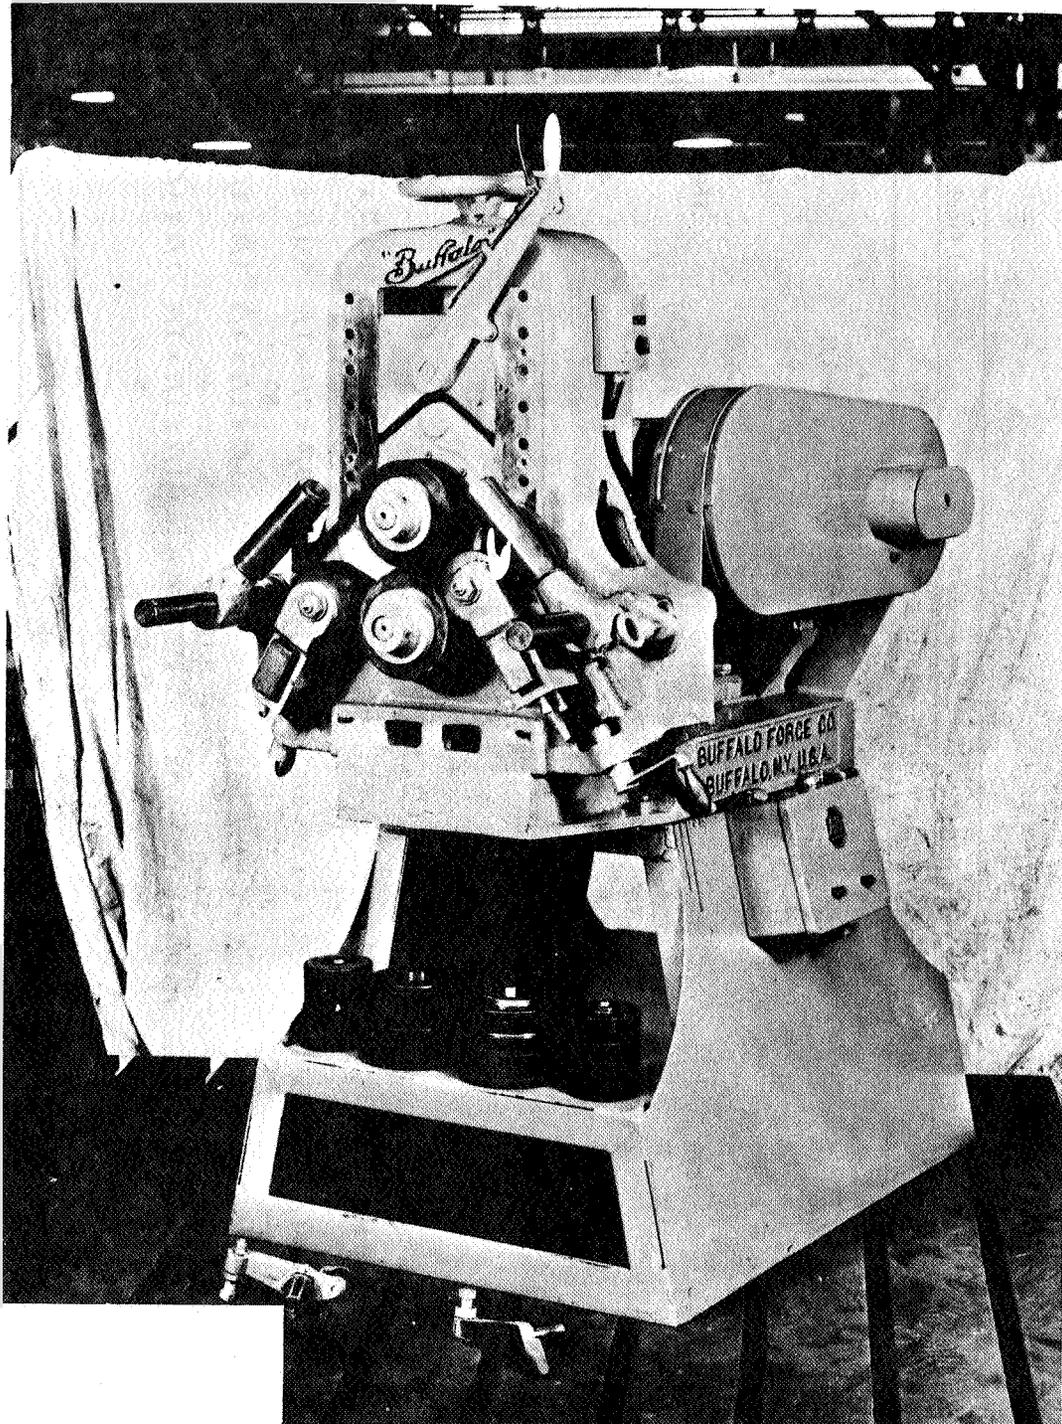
CONFIGURATION OF ROLLS IN AIRCRAFT PINCH-TYPE ROLL-BENDING MACHINE
